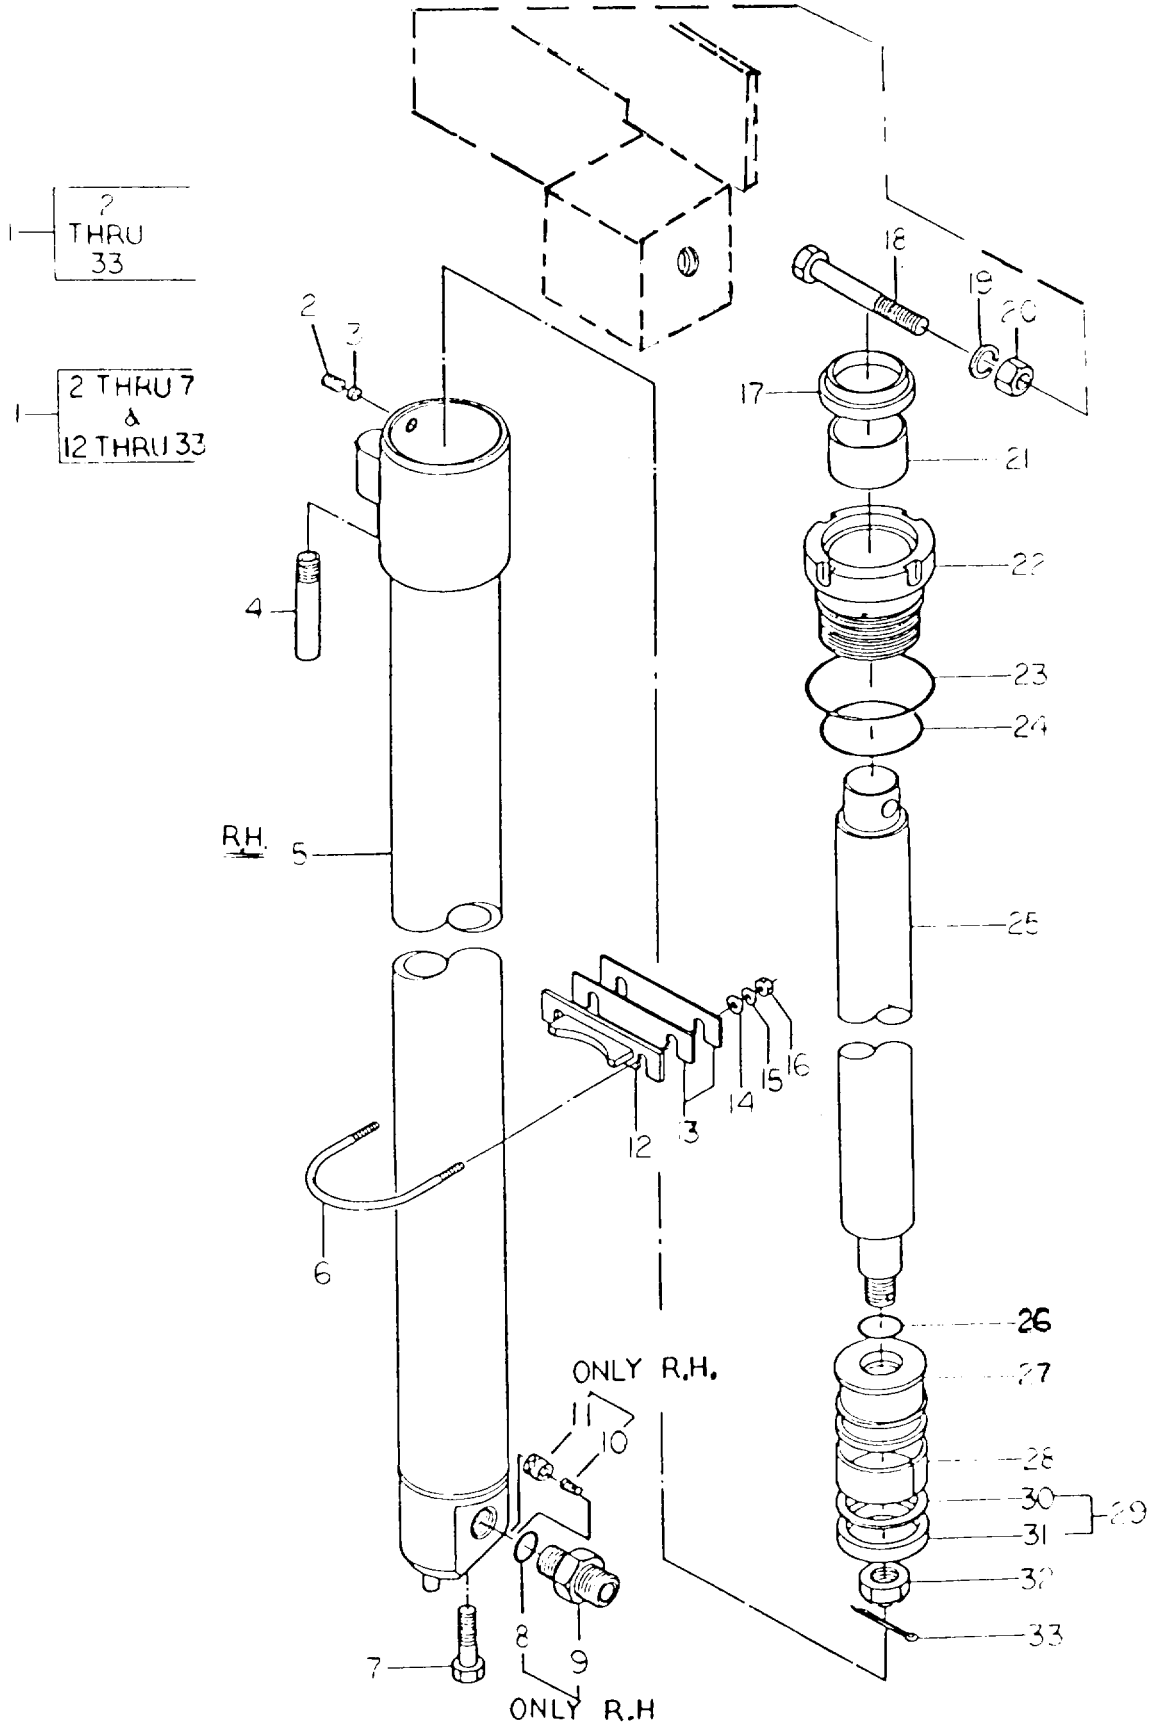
LIFT CYLINDER ASSEMBLY, REAR
